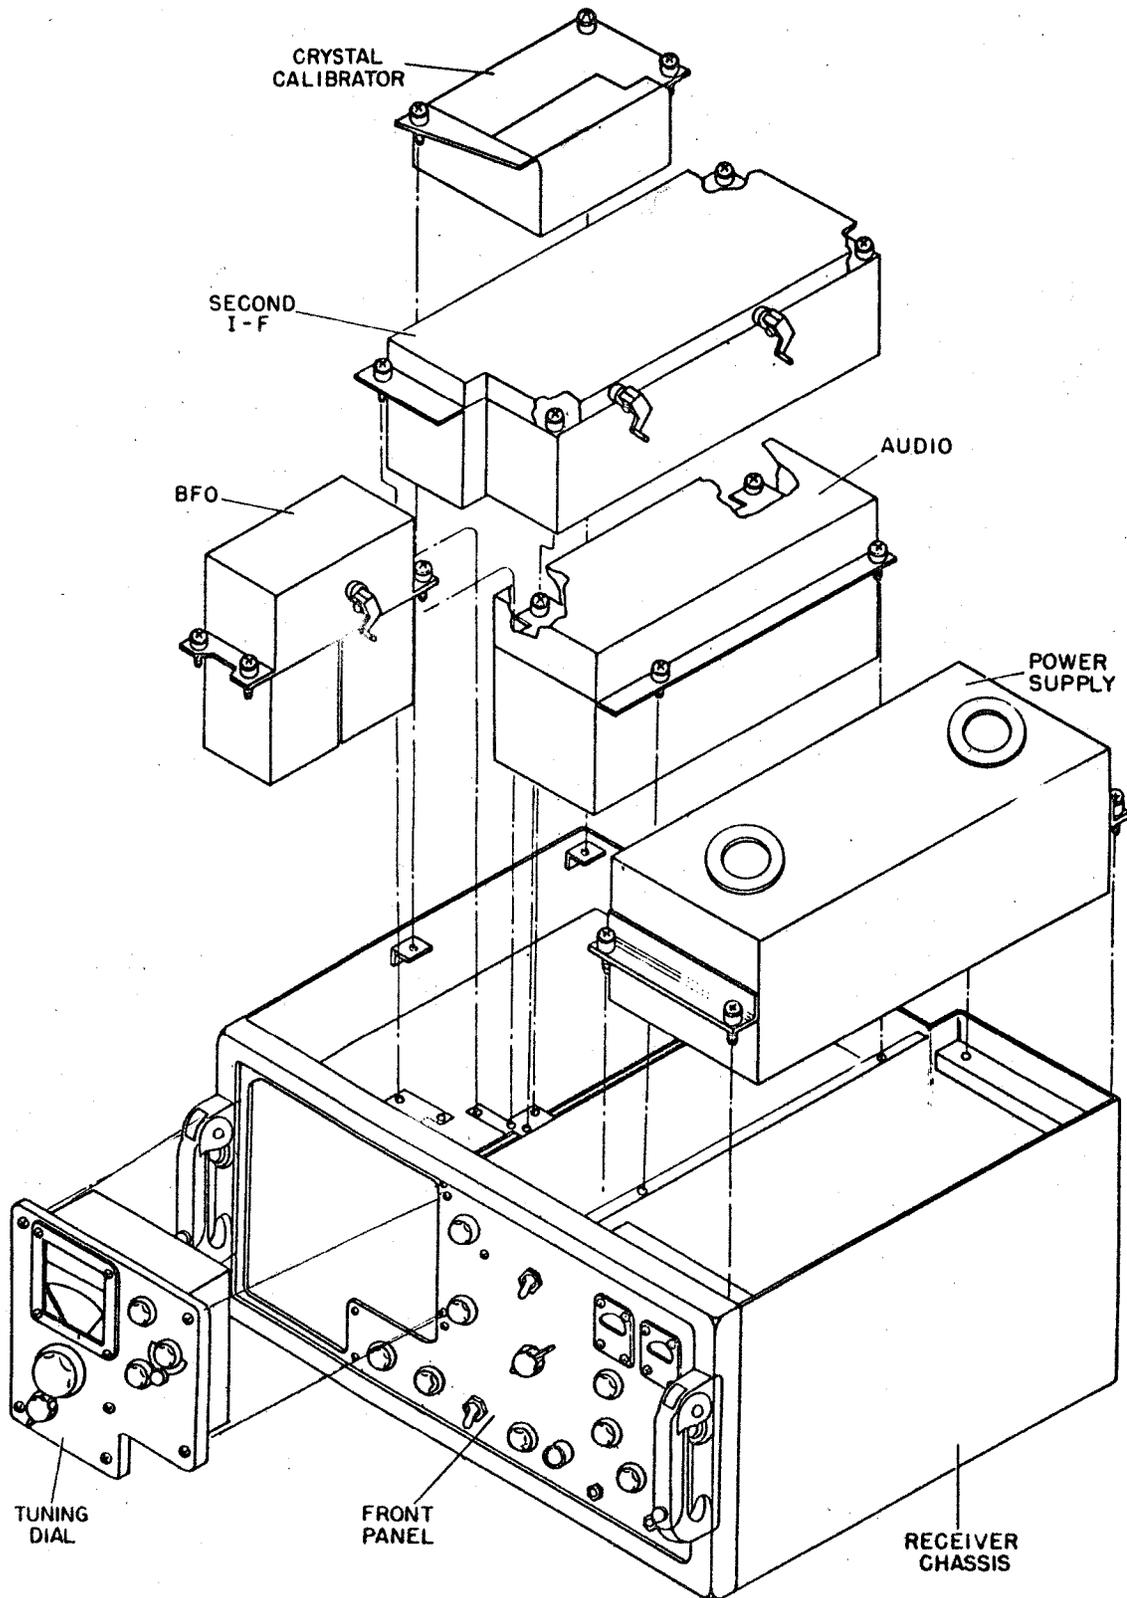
Removal and Replacement of Assemblies on Top Side of Receiver Chassis
